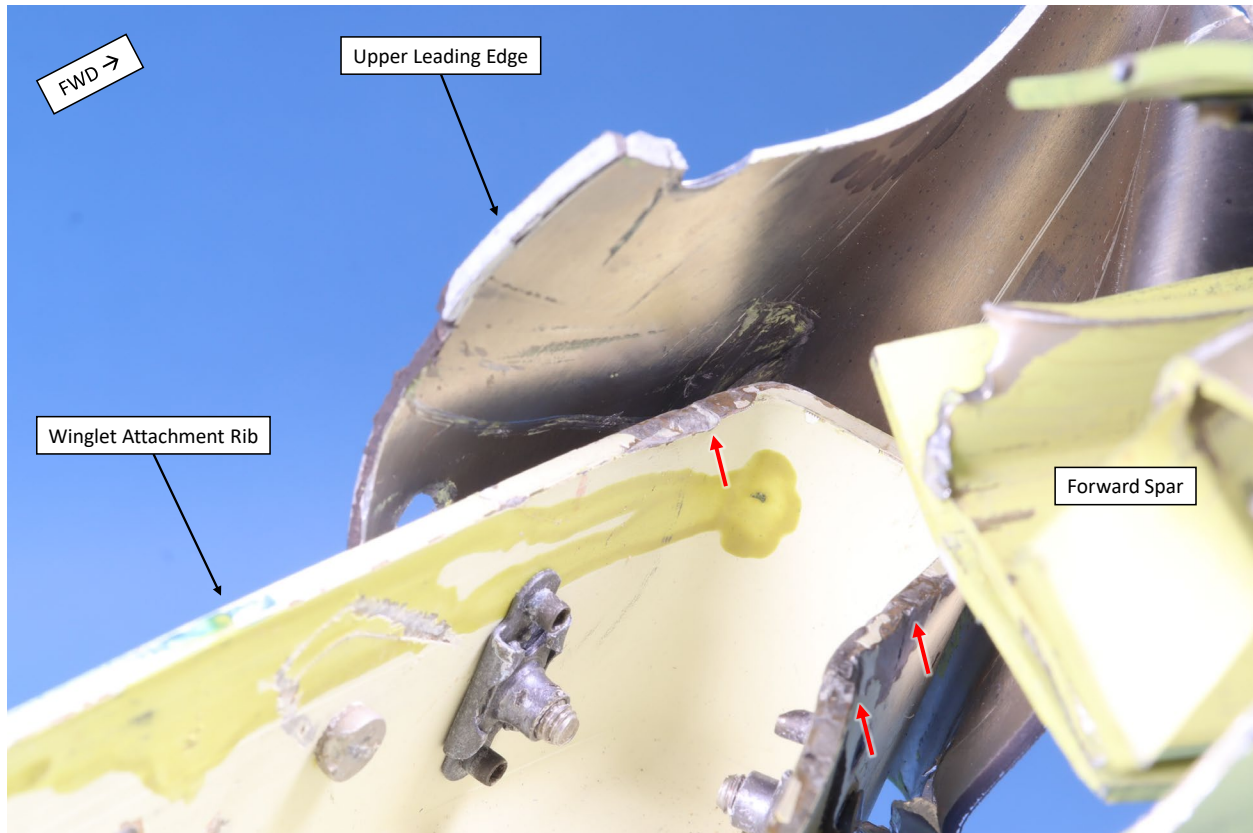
Photograph of the winglet attachment rib placed in close proximity to the connection points on the leading edge component to show the proximity to the witness marks observed on the inner surface of the leading edge. Contact marks on the inboard edge of the winglet attachment rib are indicated by red arrows.
